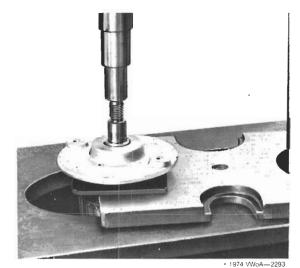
Pressing armature shaft out of end plate at fan end. Same support plate set-up can be used to press bearing off opposite end of armature.
